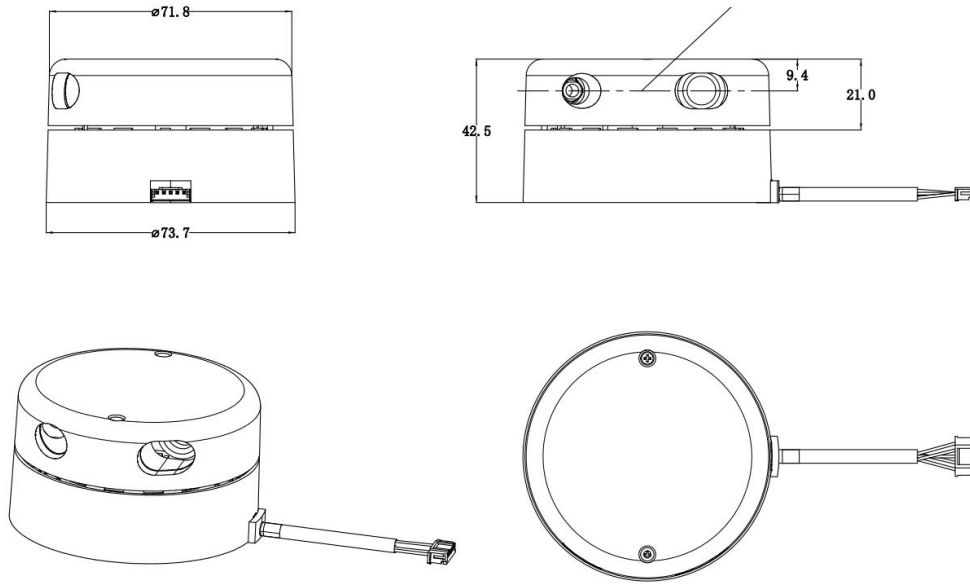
YDLIDAR G2 MECHANICAL DIMENSIONS
